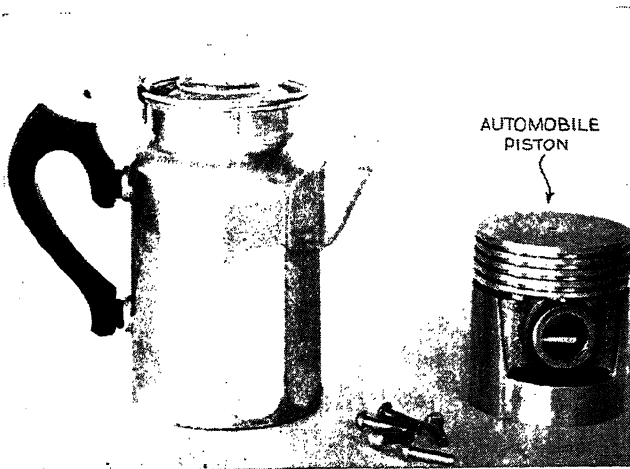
Cooking utensils and automobile parts often are made of aluminum
